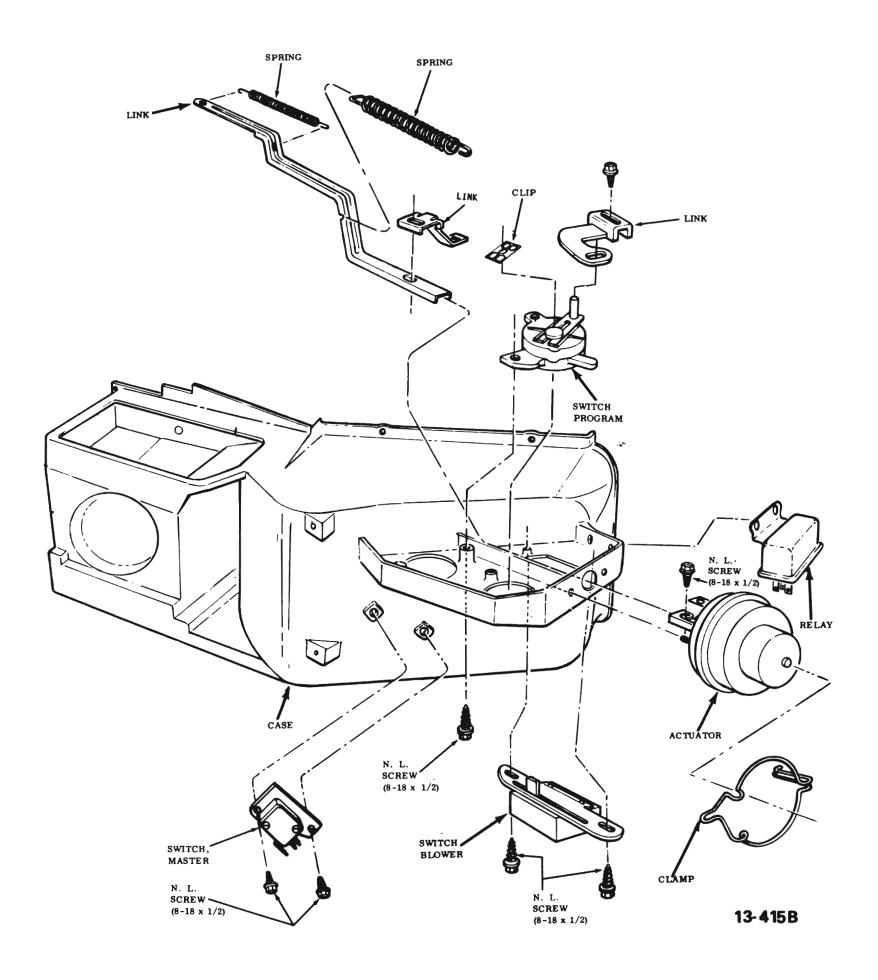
45-46-48000 Series Heater-Air Conditioner Case Assembly
